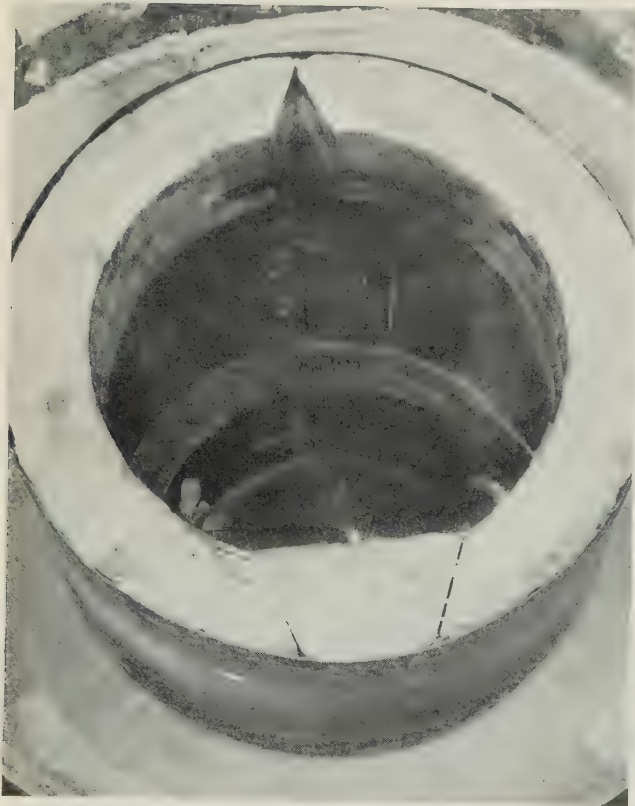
Ramming Completed to Level of Furnace Hearth and Body Casing and Wooden Body Former Fixed in Position.
